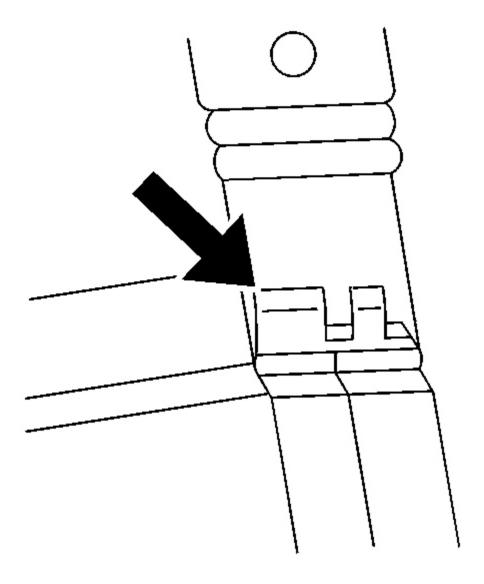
Inserting Terminal Into Terminal Holder Courtesy of GENERAL MOTORS CORP.
